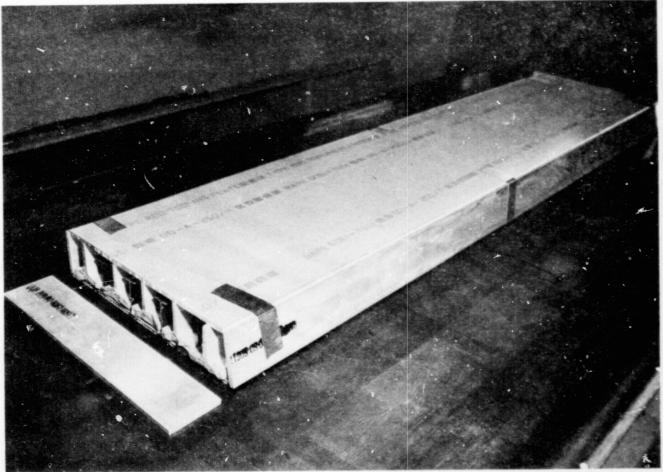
Pressure Augmenter Plate in Position Over "L" Pressure Cauls, "I" Stiffened Skin/Stringer Assembly
